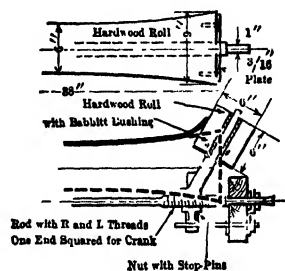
Carrying Idler and Concentrator Roll 36-inch Grain Belt. (John T. Moulton & Son, 1880.)
